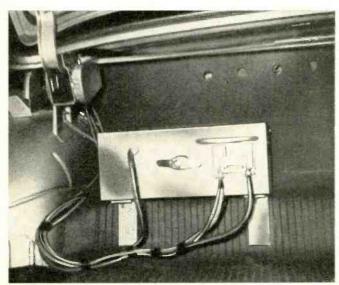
Two simple brackets support radio overhang in trunk installation. Note that all cables point to the rear.
